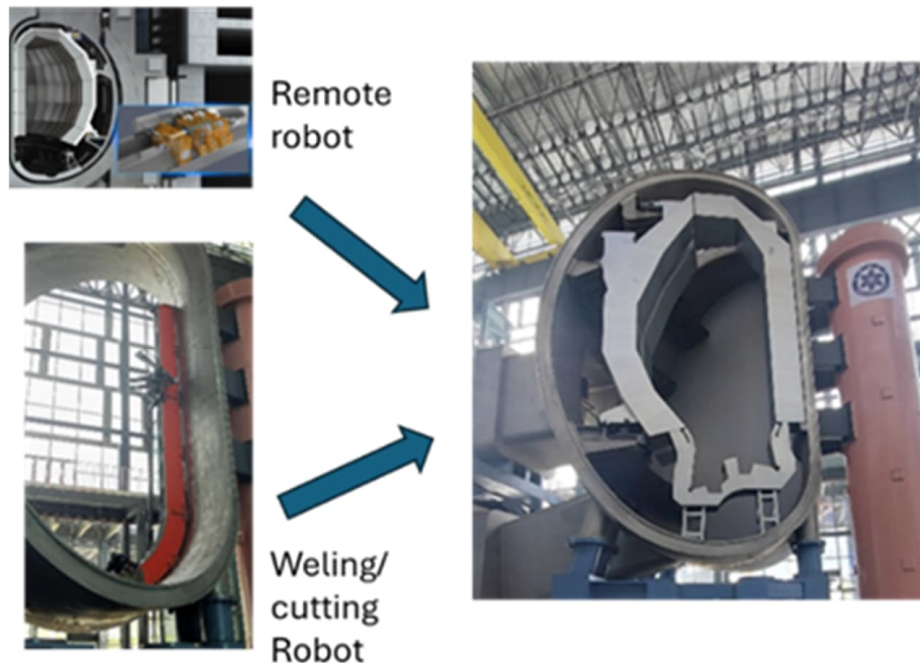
Welding/cutting machine and mobile robot and control algorithm for CFETR maintenance.
